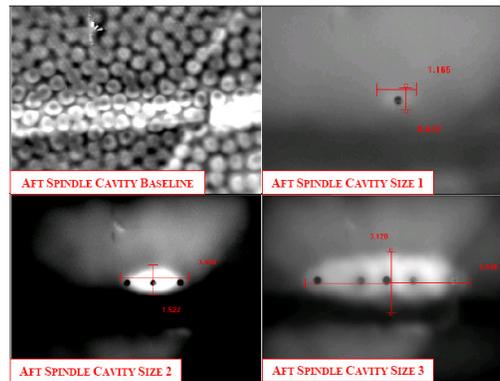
Aft Spindle Cavity Thermography Inspections Following Damage Introduction
